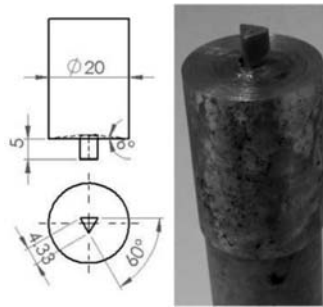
The tool with triangle pin (all dimensions are in millimeters)
